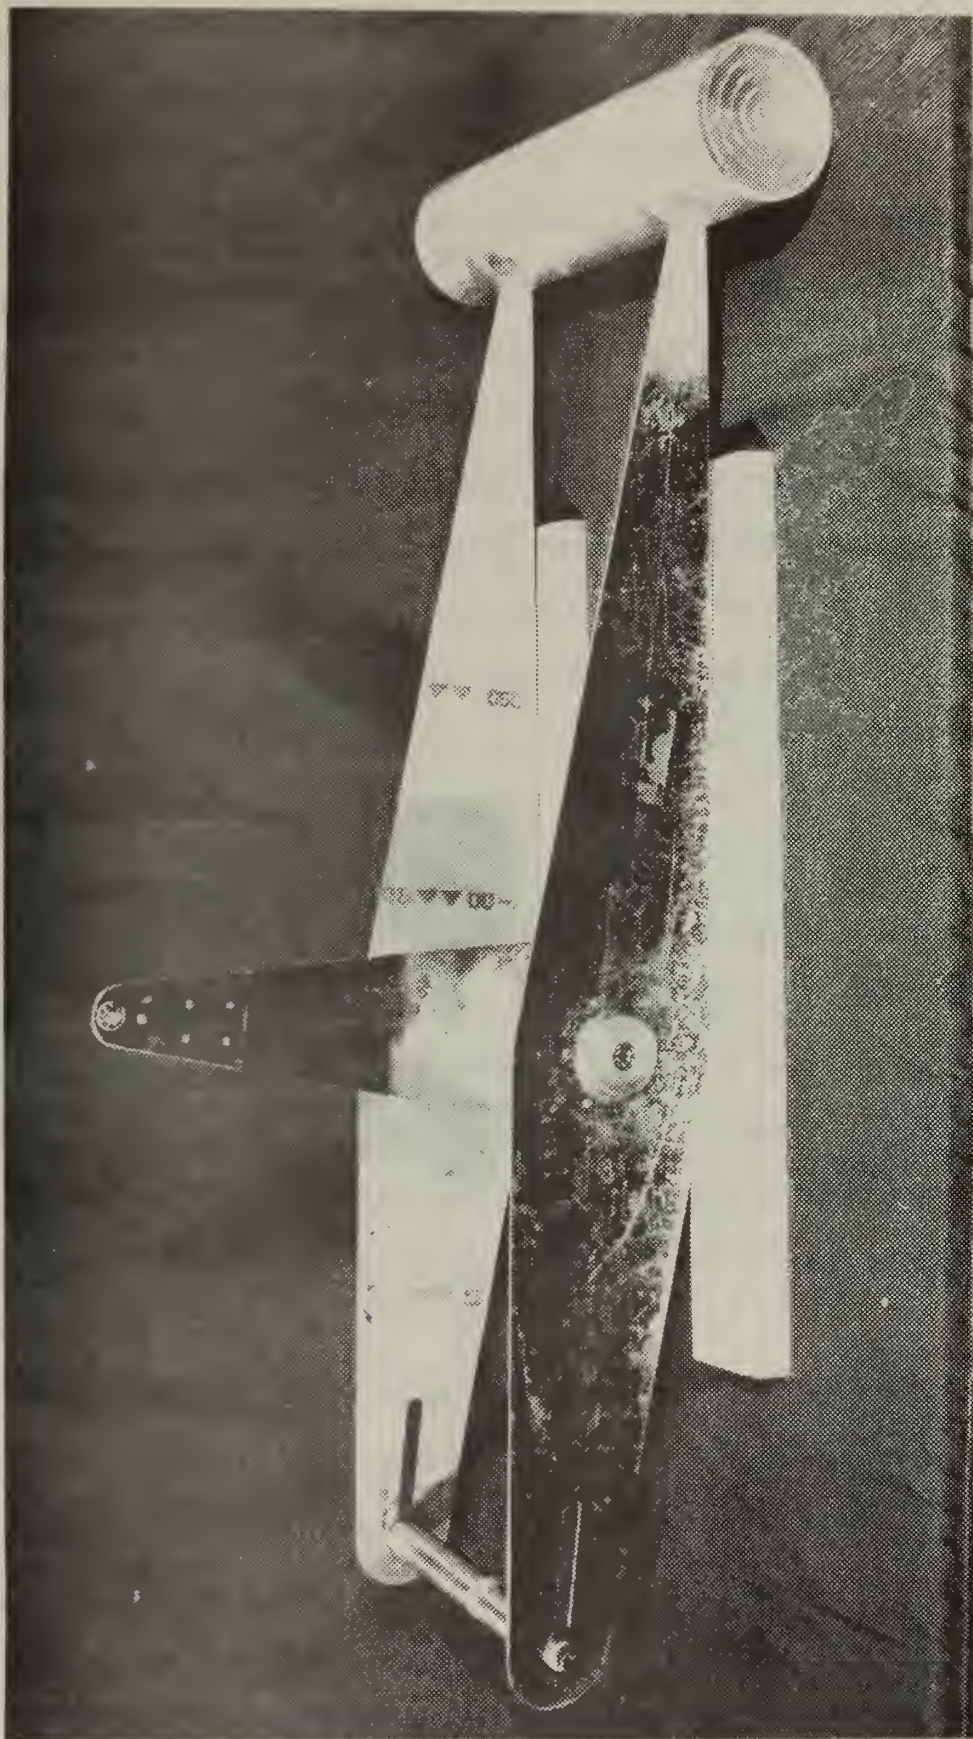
CYLINDER HOLDING AND BALANCING JIG WITH CYLINDER IN PLACE
